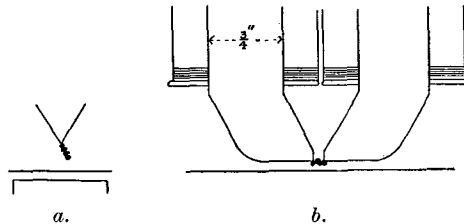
(a) Single and (b) double pole-pieces of electromagnets. (The latter is the form used in the present machine.)
